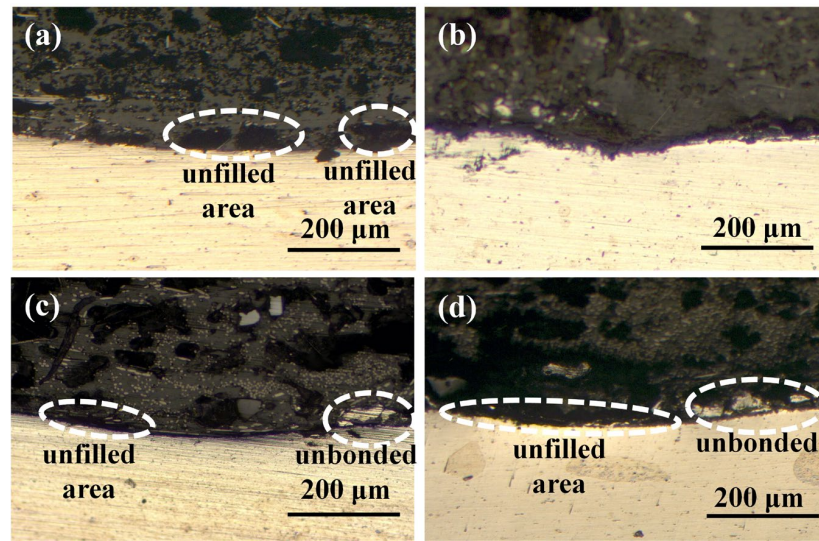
Cross-sectional morphologies of joints made with different welding forces: (a) 460 N; (b) 720 N; (c) 980 N; (d) 1260 N.
